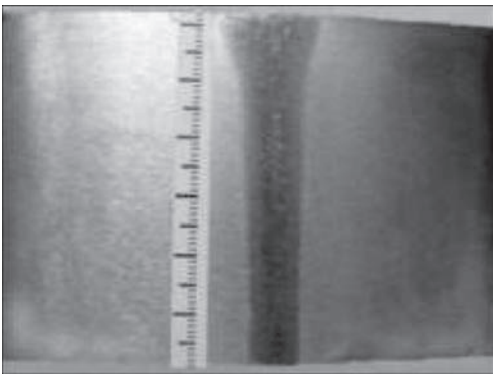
Cross-sectional macrograph of EB-welded joint 60 mm thick
